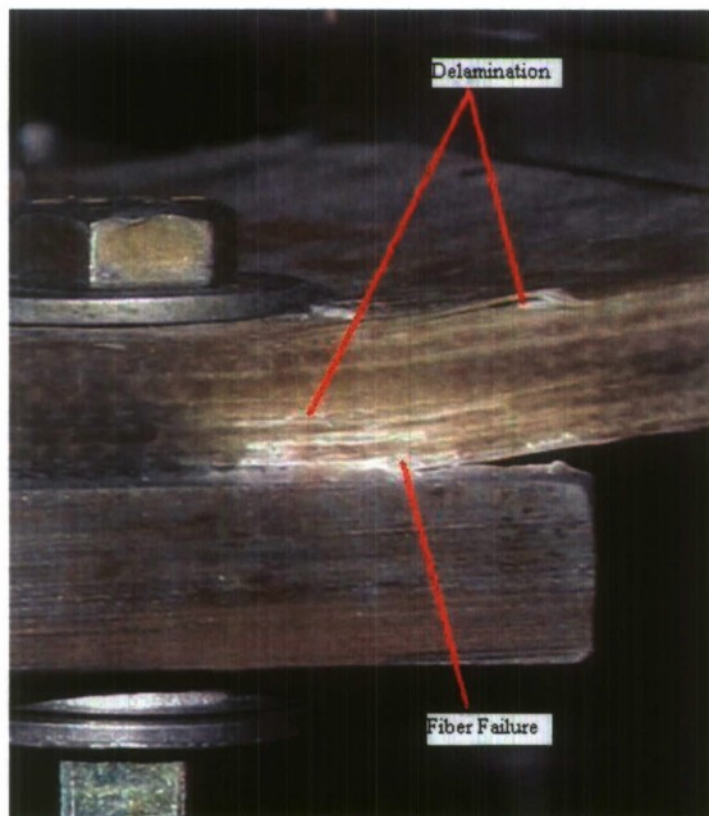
28-Ply Bolted Joint 3.5kip Fatigue Test Failure Photos
